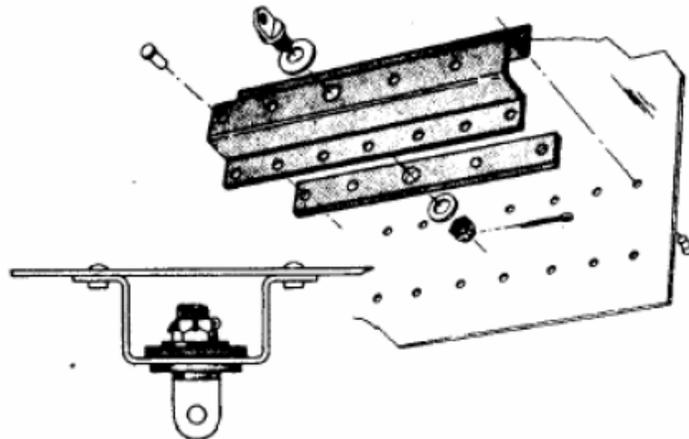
TYPICAL BULKHEAD REINFORCEMENT INSTALLATION
